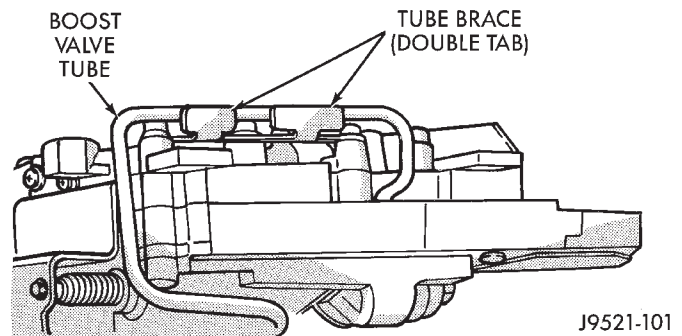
Boost Valve Tube Brace (Double Tab Style)
